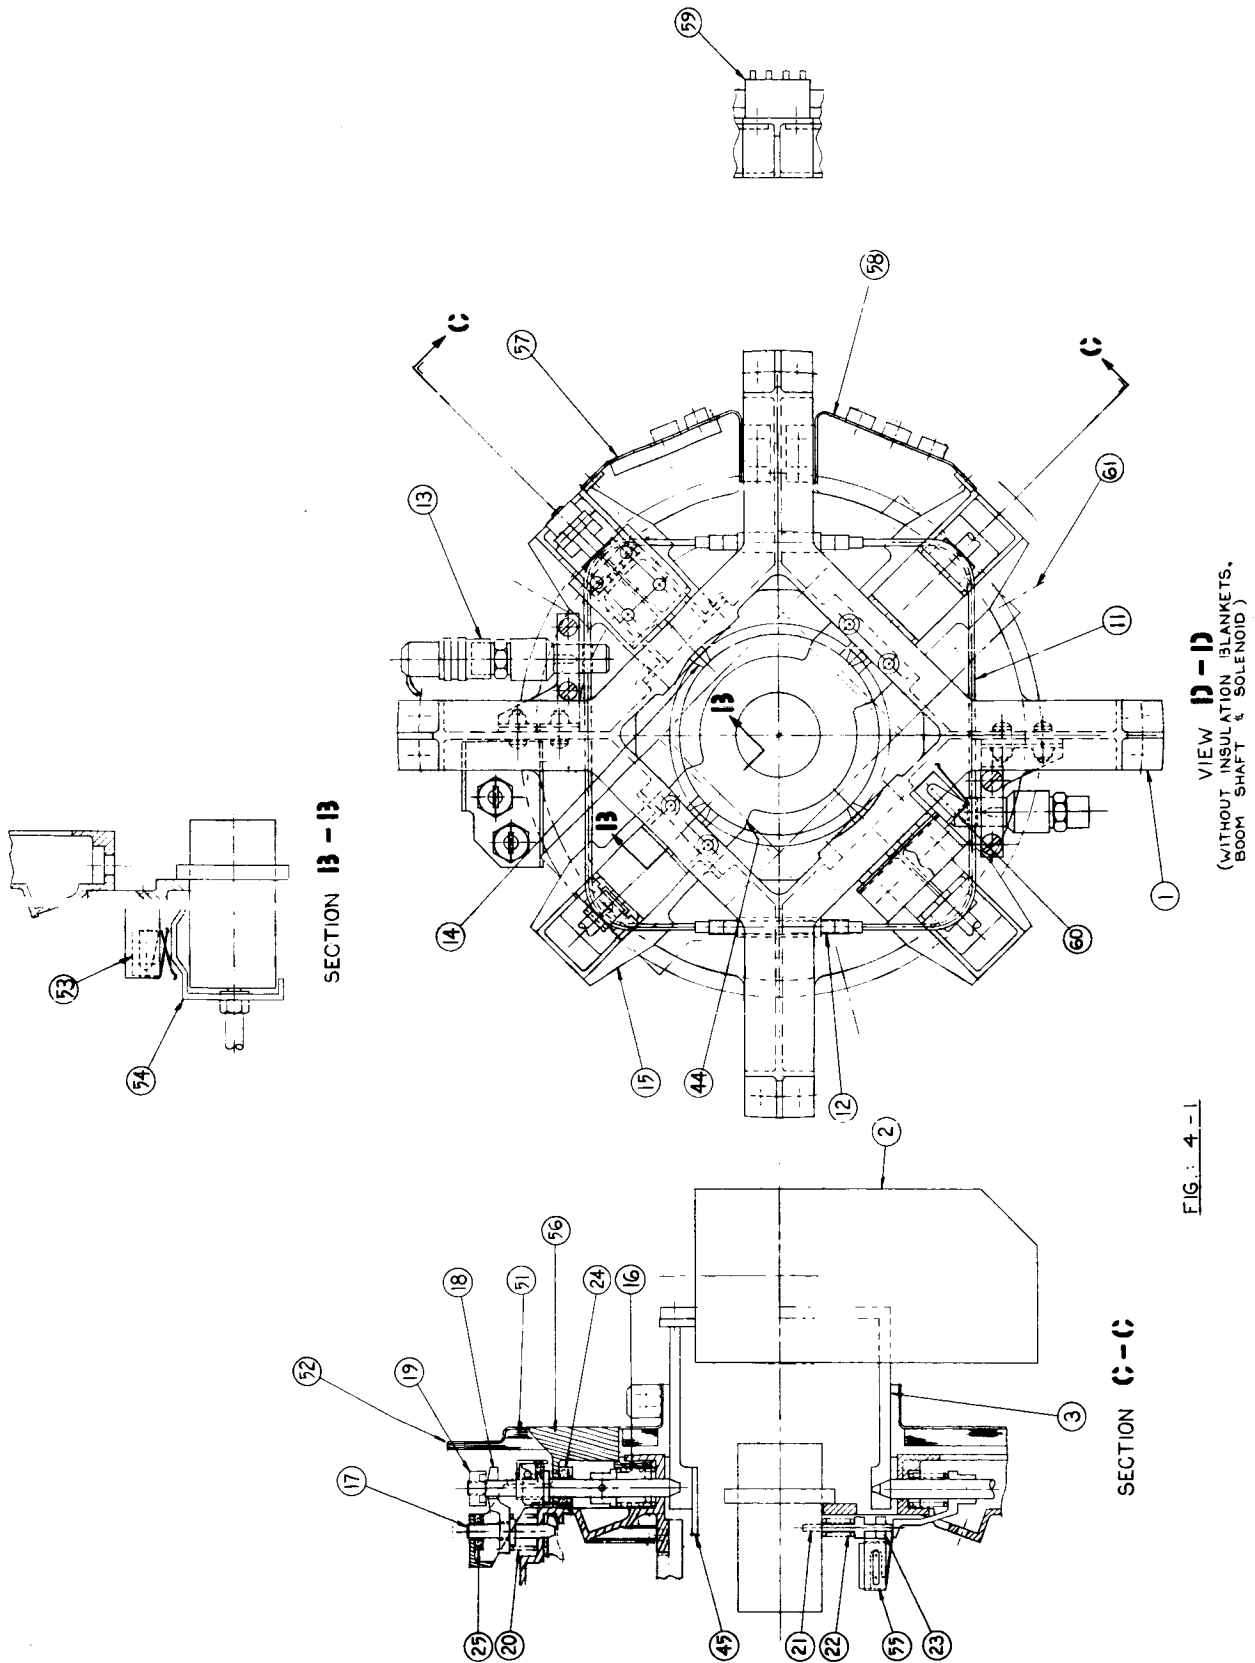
Combination Passive Damper Package (Sheet 3 of 3)
